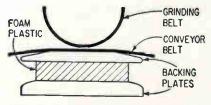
Foam plastic between backing plates enables abrasive belt to be used as belt grinder conveyor belt
